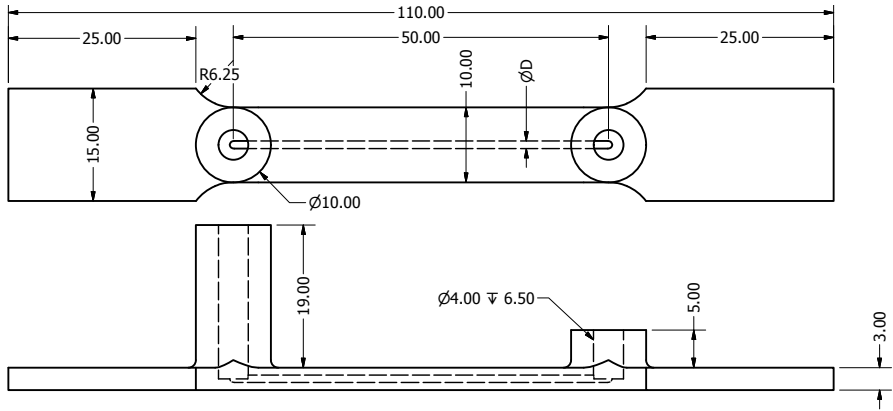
Dimensions of the metal additive manufactured tensile test specimen (in mm).
